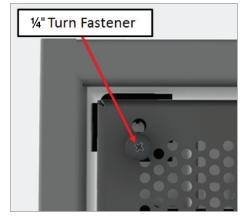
Hinged Grille – 1/4"-Turn Fastener
